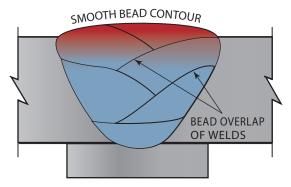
The surface of a multipass weld should be as smooth as if it were made by one weld.
